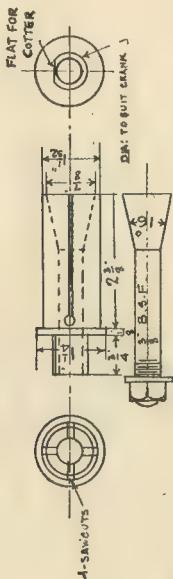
EXPANDING PLUG FOR CRANK HANDLE.
